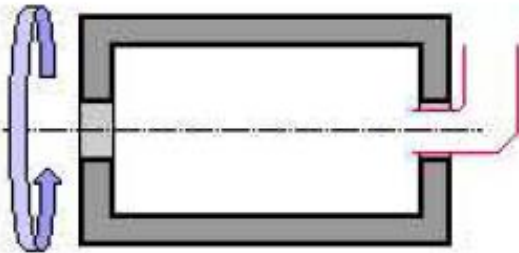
Schematic illustration of the centrifugal casting process. Pipes, cylinder liners, and similarly shaped parts can be cast by this process.
